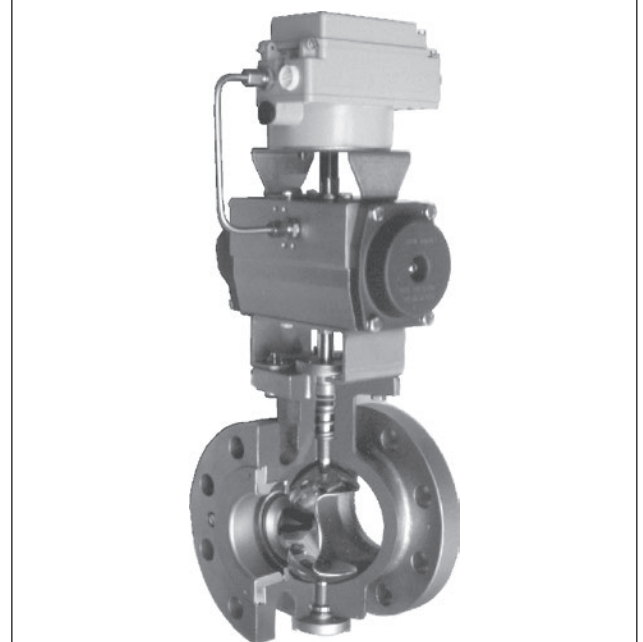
Cutaway view of Type 3310 Segmented Ball Valve with Type 31a Pneumatic Rotary Actuator and positioner
